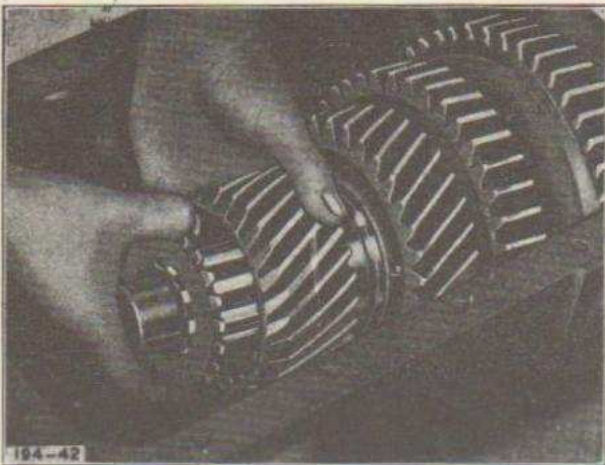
Removing Fourth Speed Gear and Thrust Washer
